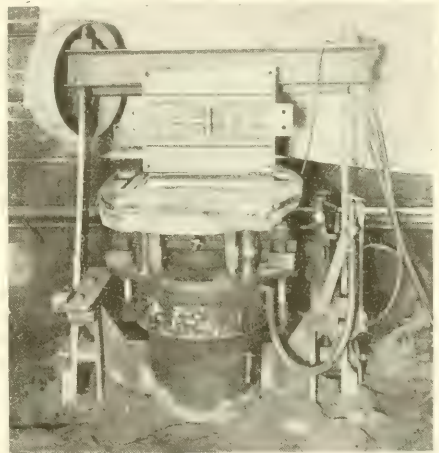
MOLDING MACHINE EQUIPPED WITH ELECTRIC HEATERS
